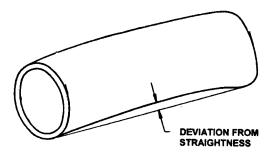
STRAIGHTNESS TOLERANCE FOR EXTRUDED ROUND TUBES
